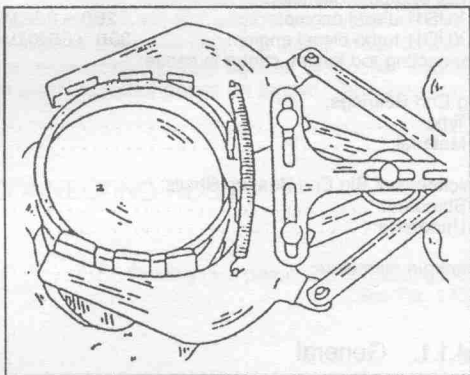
Removal or installation of piston rings with a pair of piston ring pliers.
